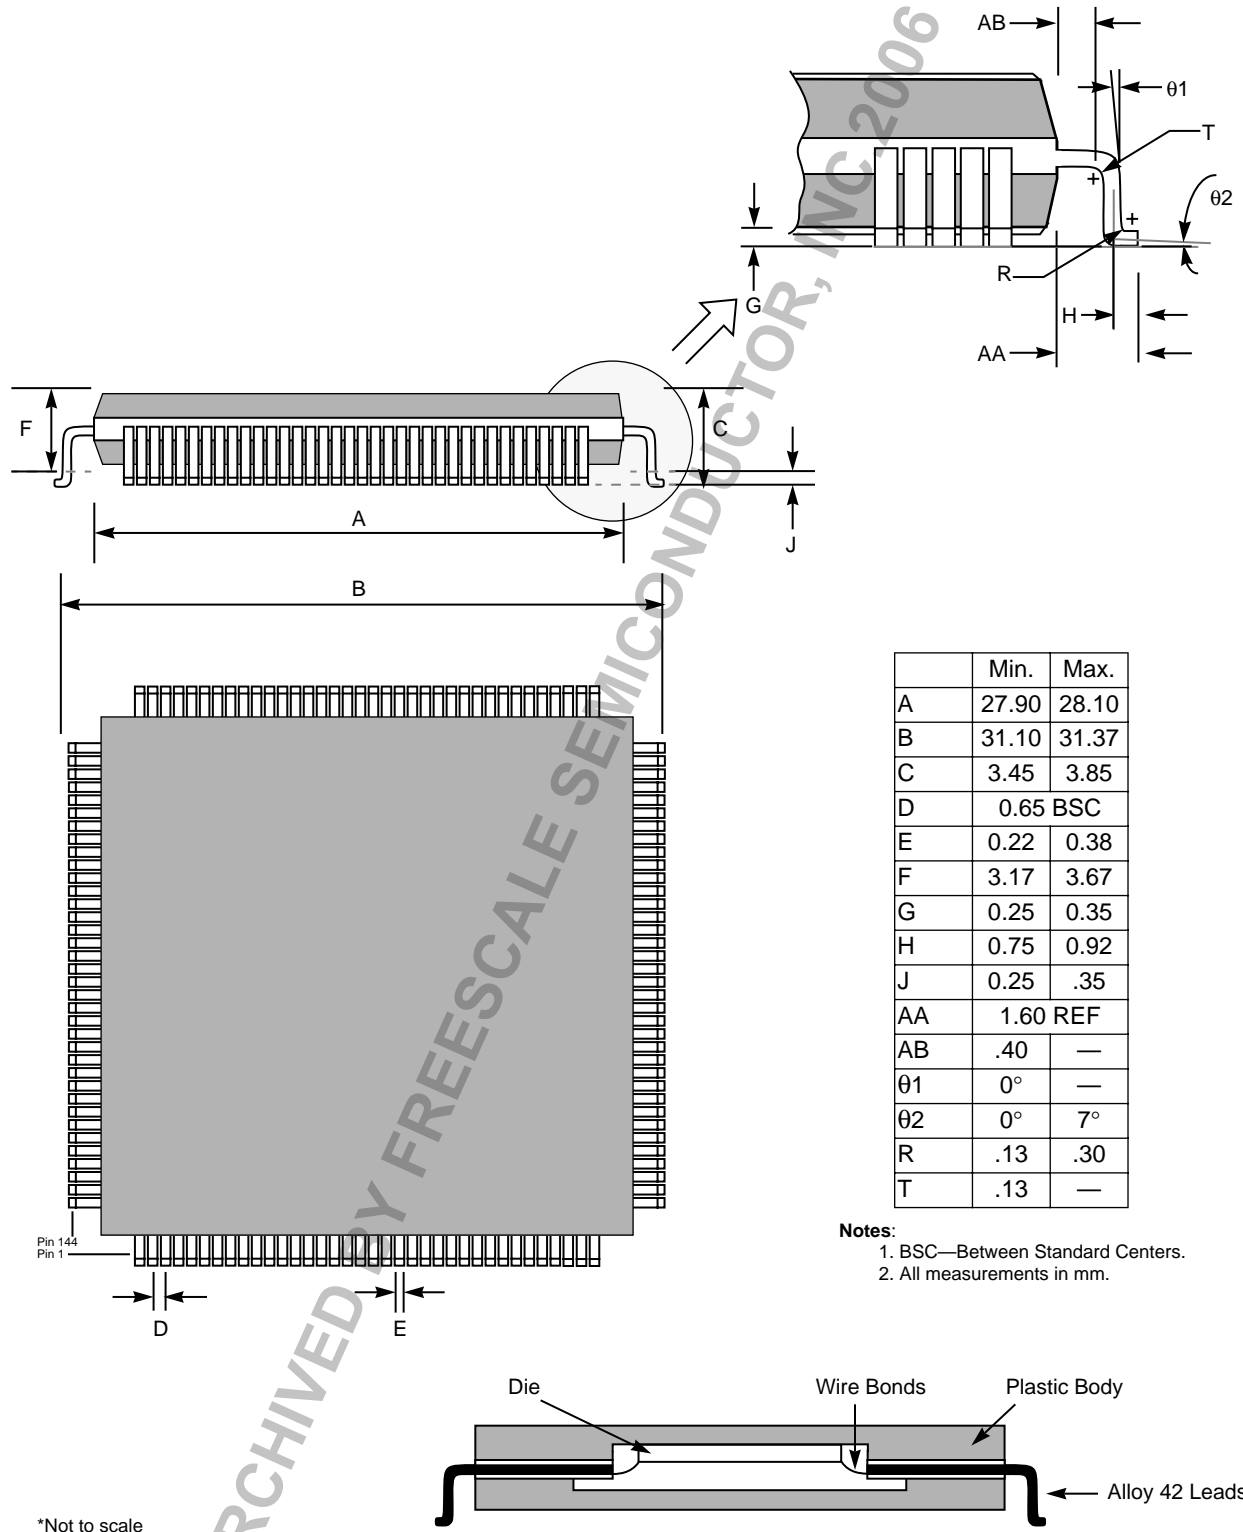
Mechanical Dimensions of the Motorola Wire-Bond PQFP Package
